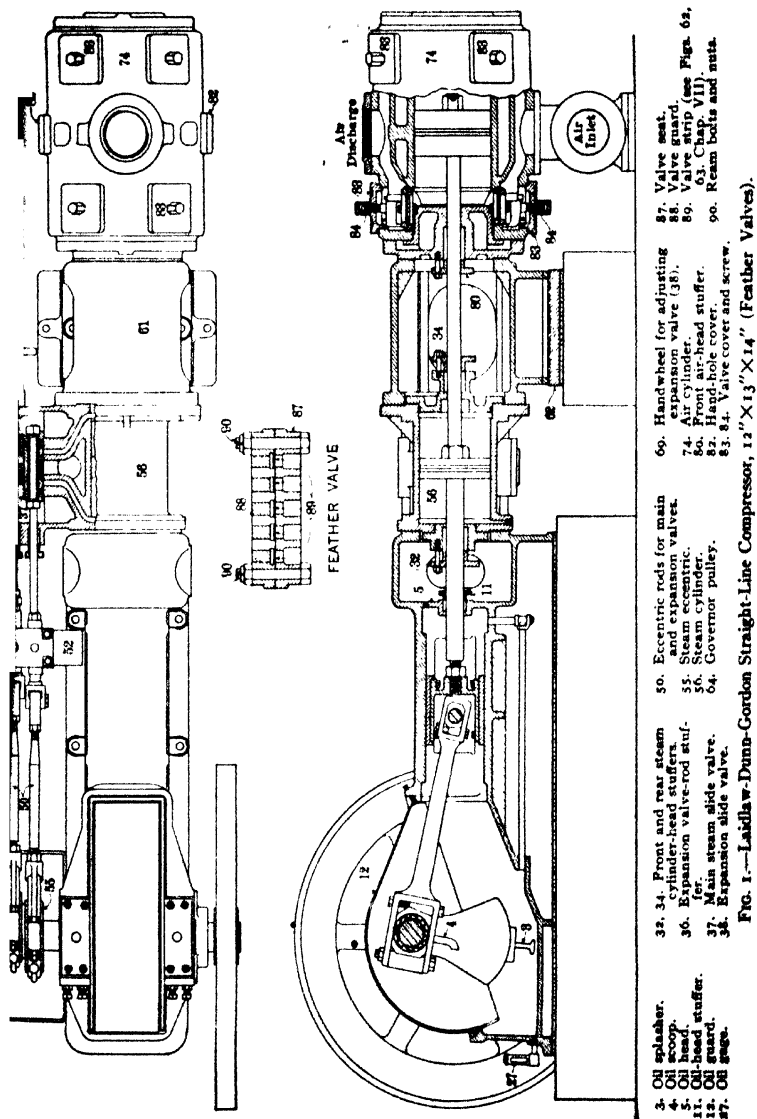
Laidlaw-Dunn-Gordon Straight-Line Compressor, 12"X13"X14" (Feather Valves).
